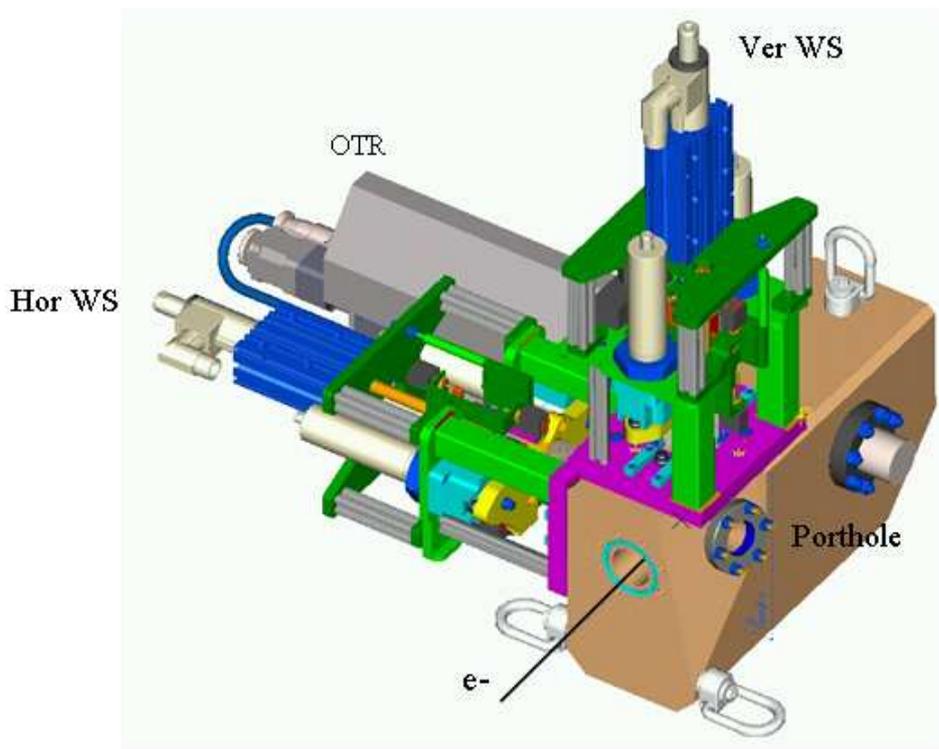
Designed horizontal and vertical wire scanners mounted on vacuum chamber.
